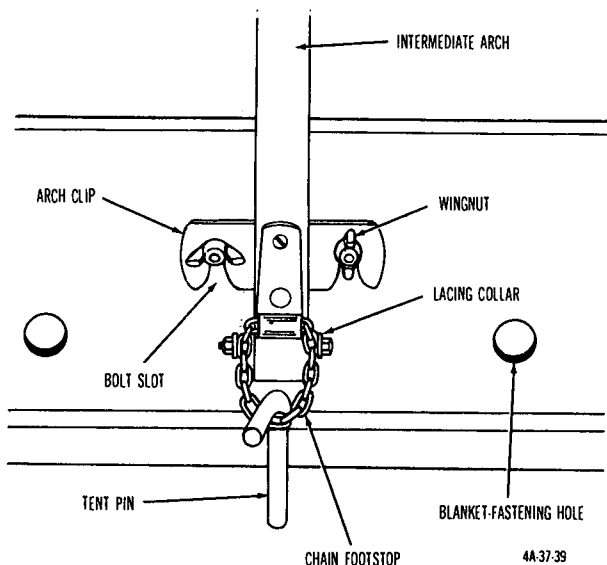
Attaching arches to floor of tent, frame-type, insulated, sectional.
